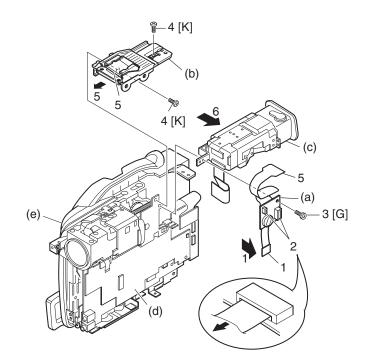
SHE Circuit Board, Accessory Shoe, and EVF Unit
